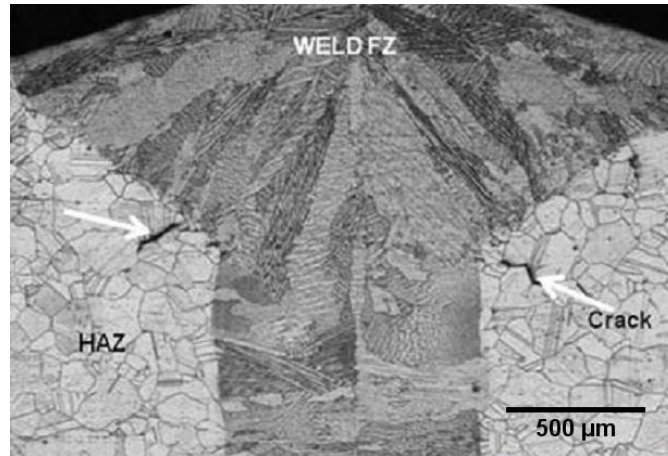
Optical micrograph of the weld cross-section of laser welded HY 282 alloy showing strain-age cracking in the HAZ close to the FZ after solution heat treatment [18]
